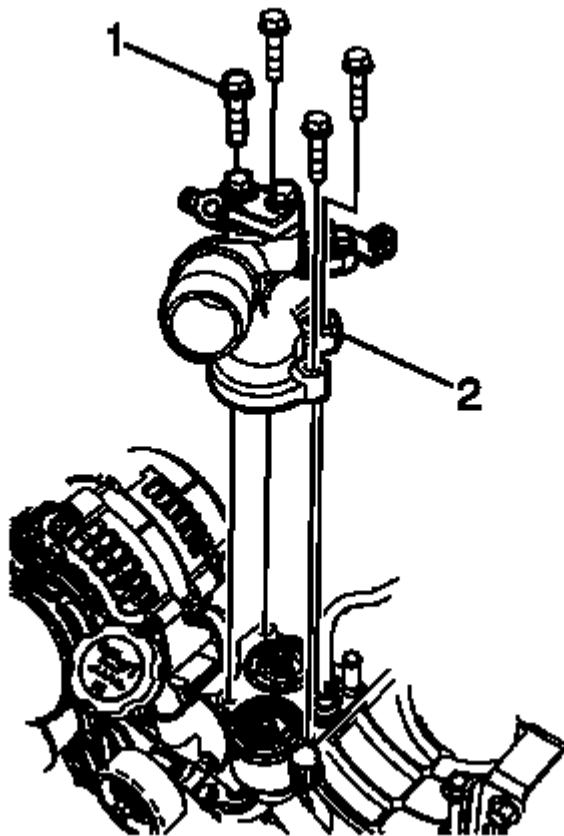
Identifying Thermostat Bolts & Engine Coolant Outlet Pipe
